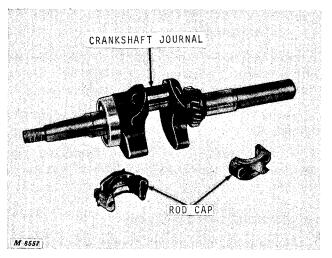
Scored and Galled Crankshaft Journal and Rod Cap Caused by Lack of Lubrication
